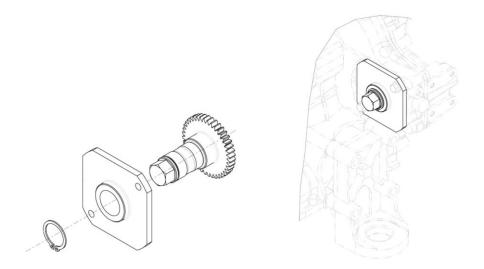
Turning device - Auxiliary output NA4 attachment special tool no. 30d
